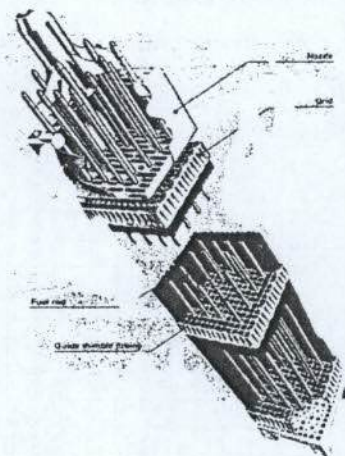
Nuclear fuel assembly in which Zircaloy cladding tubes are used
